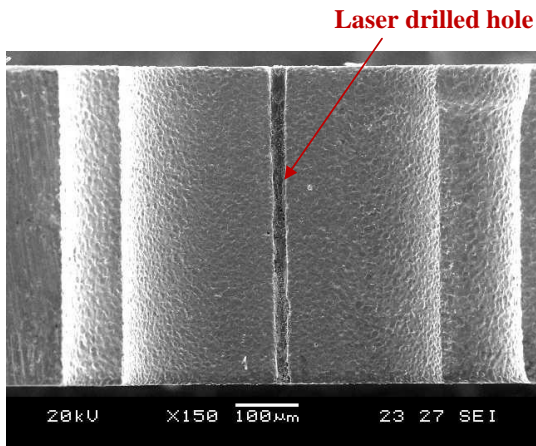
Cross section of the laser drilled hole using a STS cover plate
